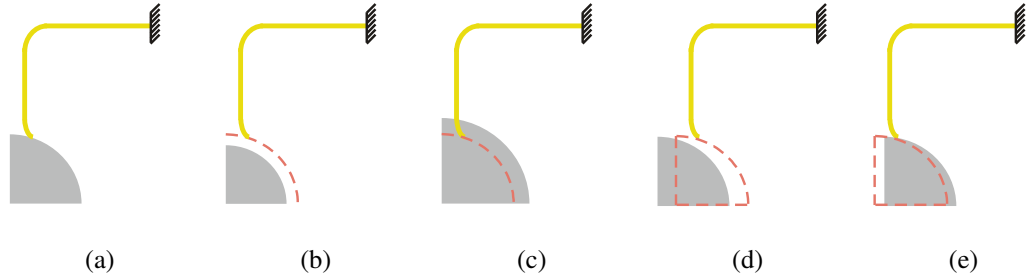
Significant geometric uncertainties for simulated pin joints. (a) Ideal case. (b) Cam radius too small. (c) Cam radius too big. (d) Cam and spring not fully assembled. (e) Cam and spring over assembled.
